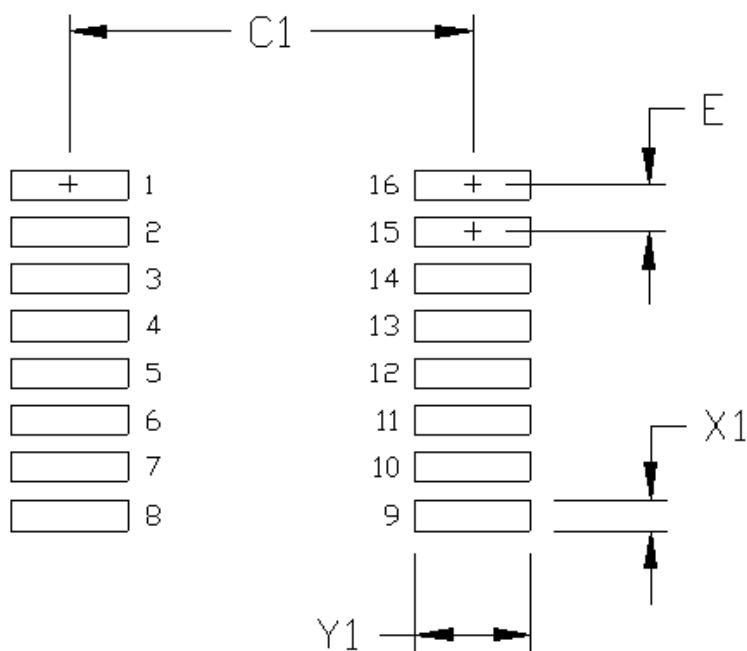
16-Pin QSOP PCB Land Pattern
